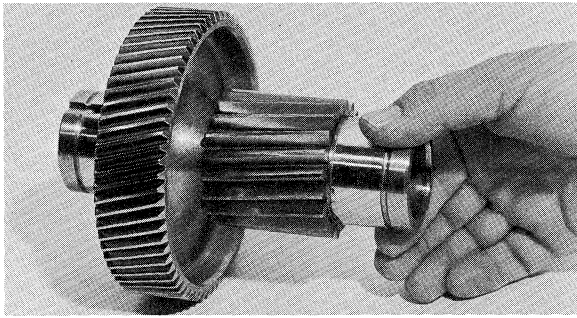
A shoulder gear for a jet engine reduction set whose smaller helical gear is ground, Fig. 6-49.
